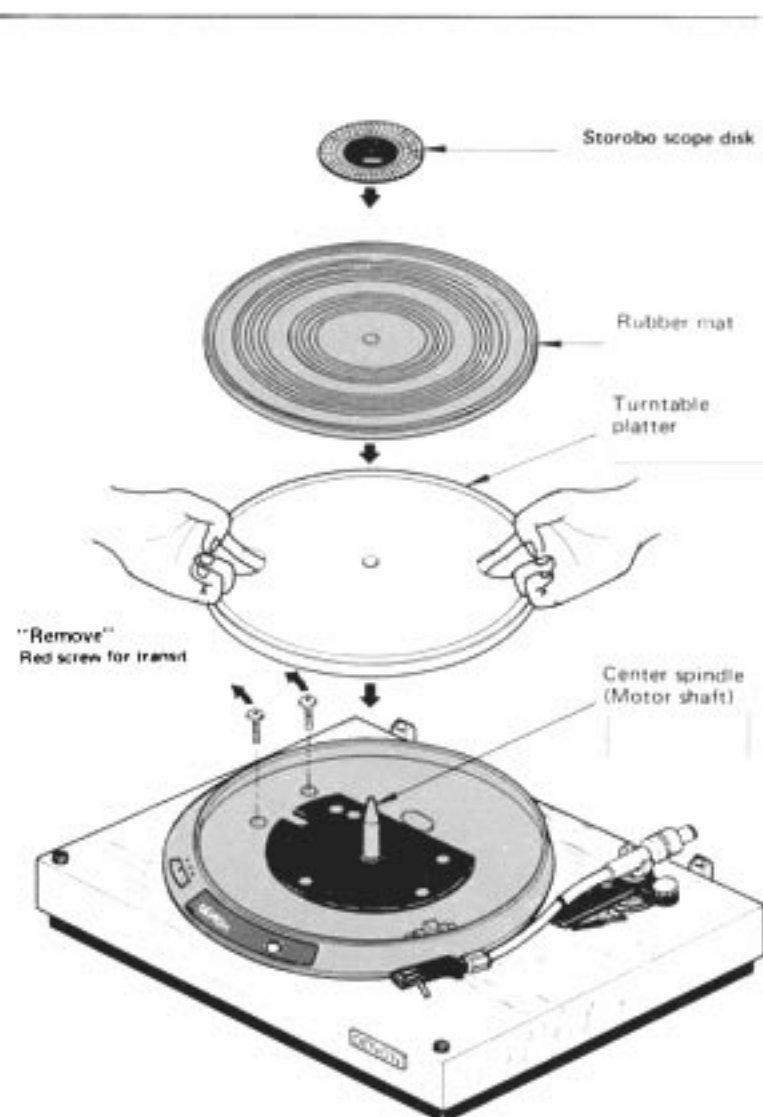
Mounting the Turntable Platter and Rubber Mat
